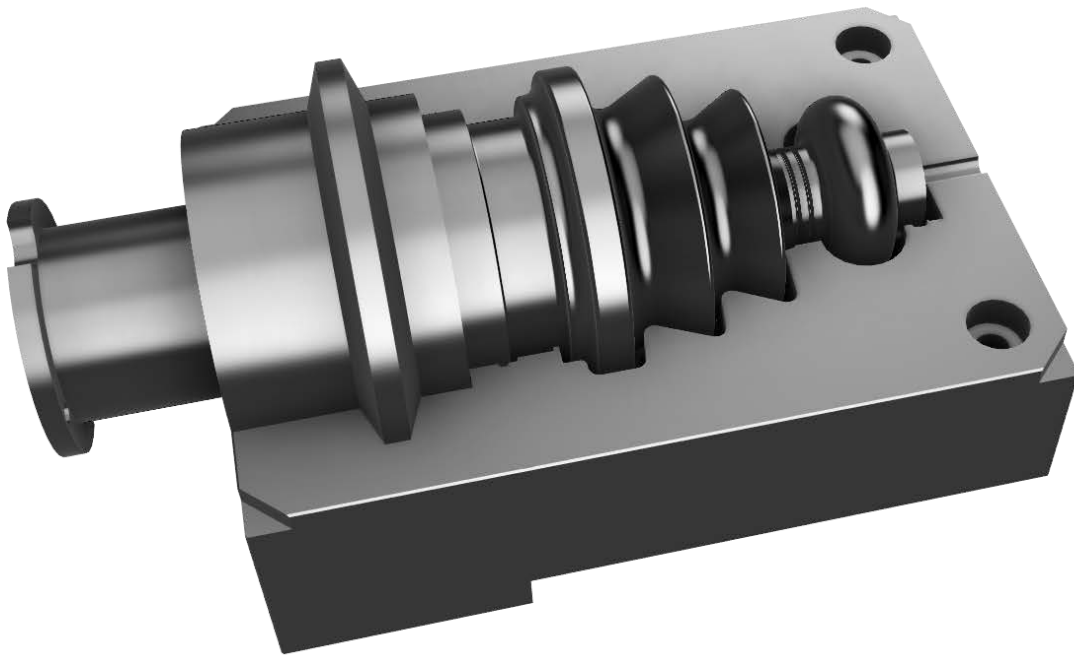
Bottom half of a polymer injection mold, with insert.
